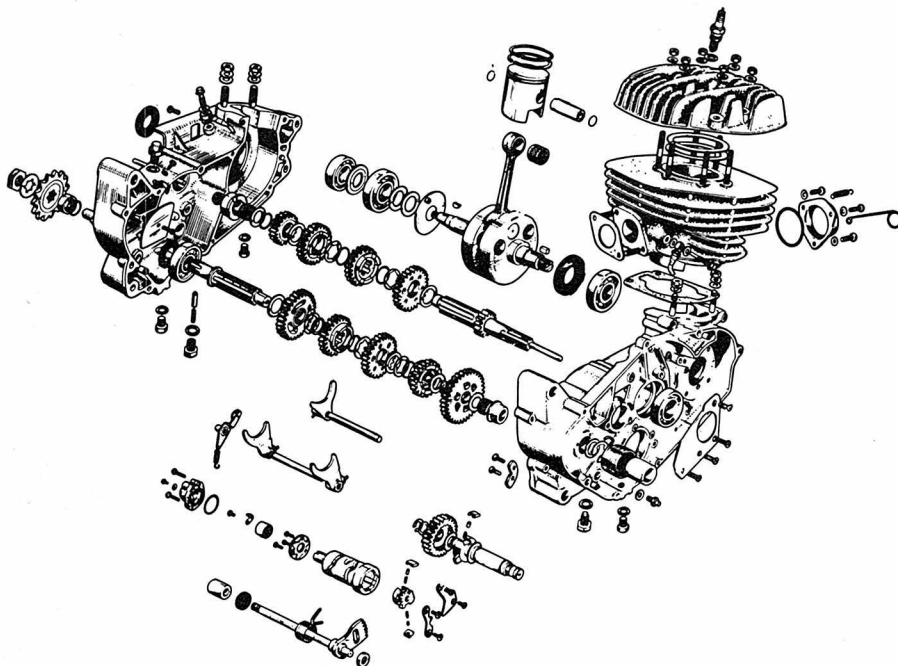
Exploded view of TS 250 engine and transmission assembly. Minor differences may be seen between this unit and TS 250 R model.
